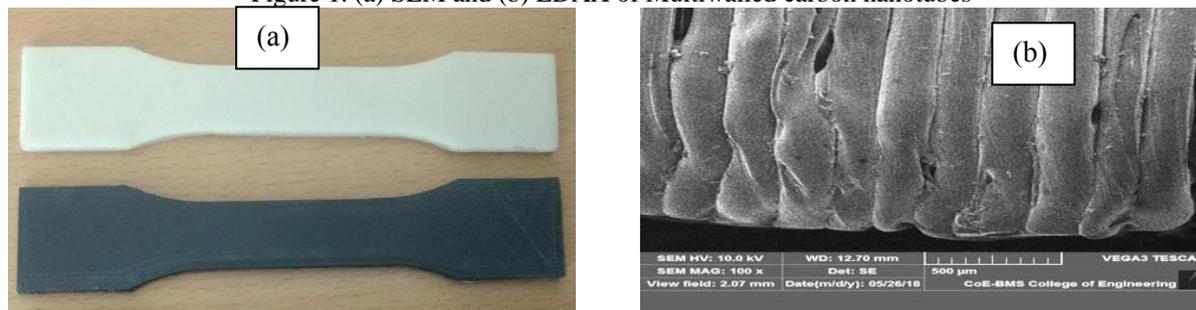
(a) Photograph of Tensile Test Specimen (b) SEM of printed layers
